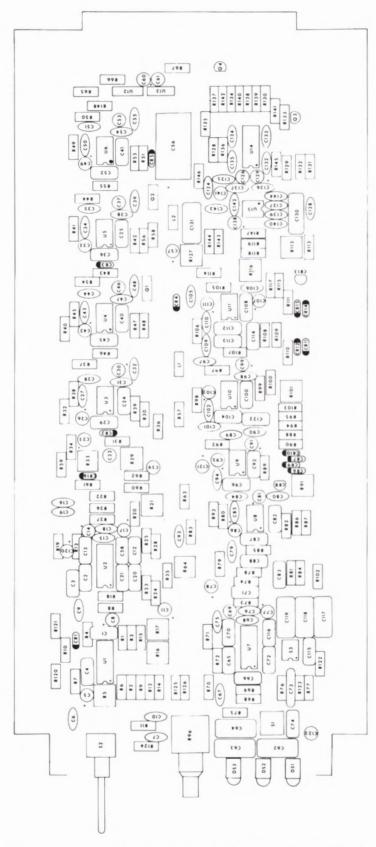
(SHEET 2 OF 2) PROTECTION BOARD COMPONENT LOCATION - 843 2191 001
